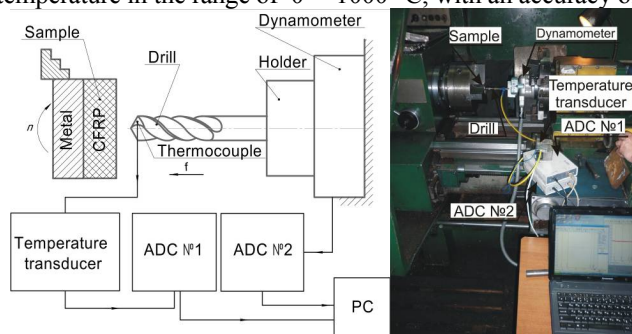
Drilling experimental set up at CNC Lathe machine 16Б16Т1
